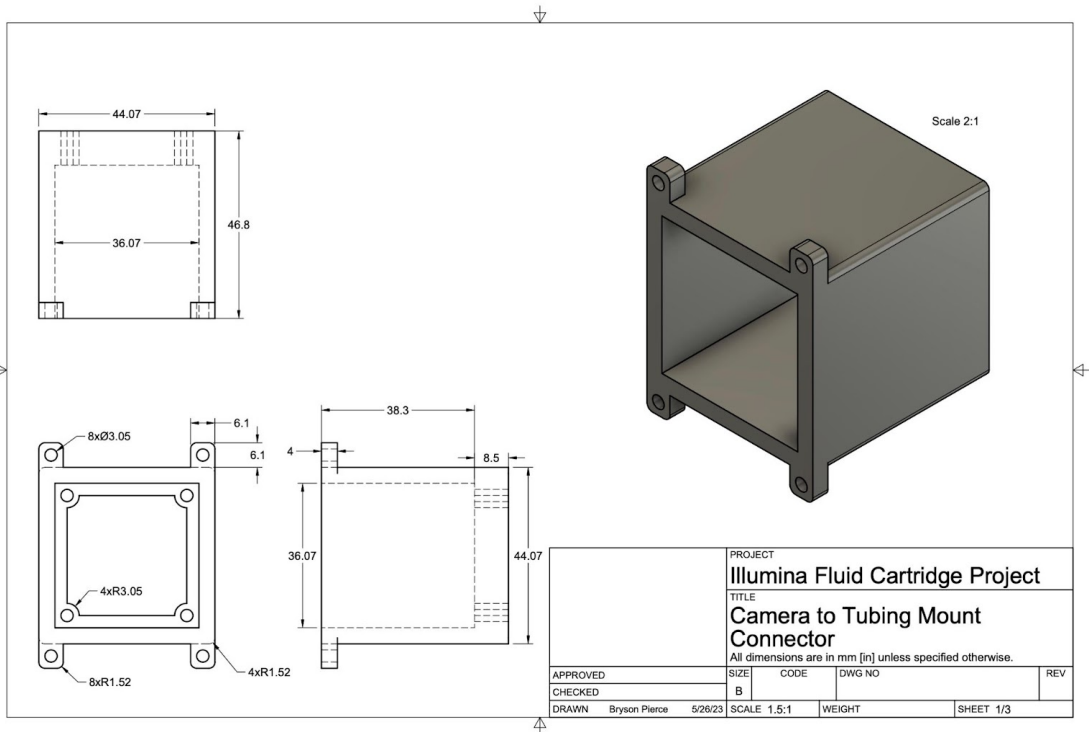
Technical drawing of the connector component in the tubing mount. This connected the filter cage of the camera directly to bottom plate of the mount, as drawn in Figure 4b, as well as providing a dark environment for imaging. Can be seen in clearer detail in Appendix C.
